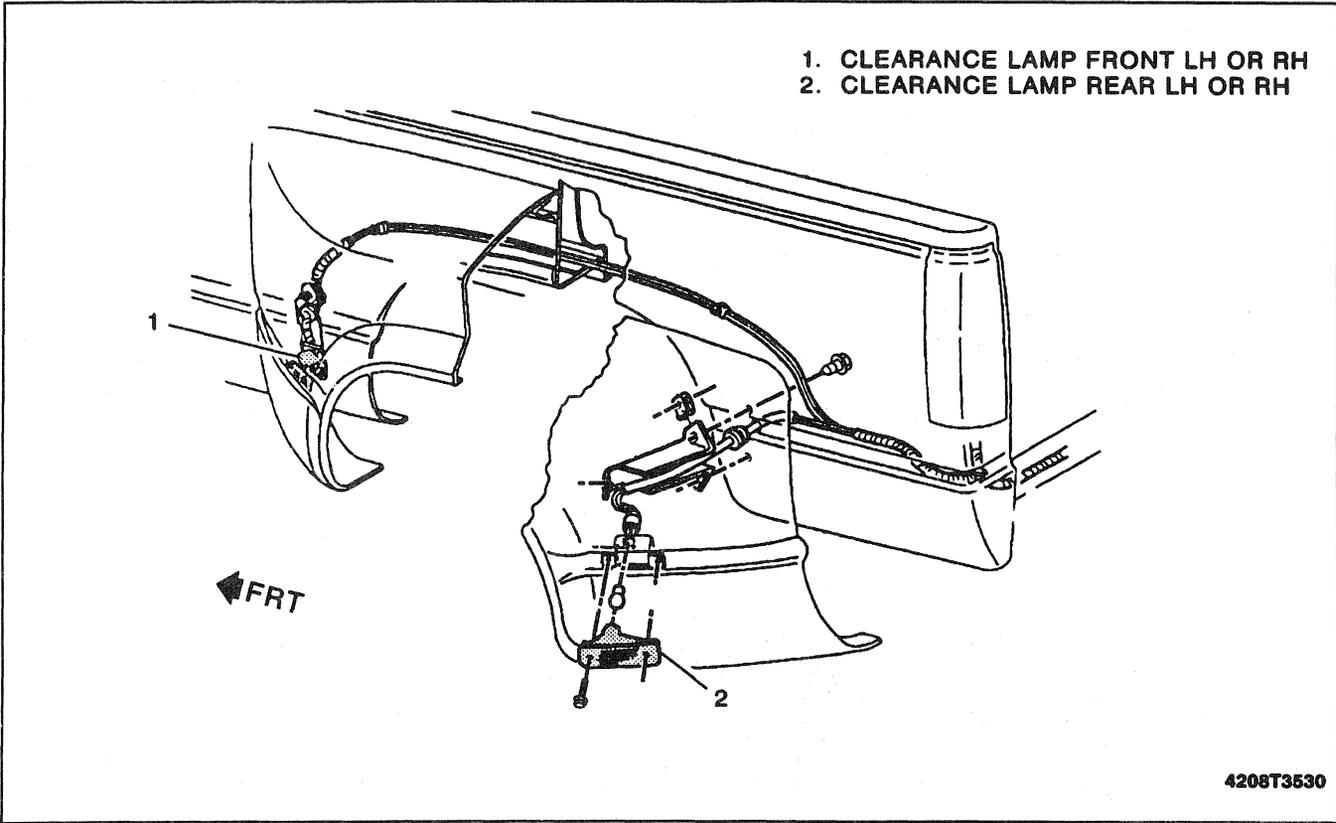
Rear Clearance Lamps (With Dual Rear Wheels)
